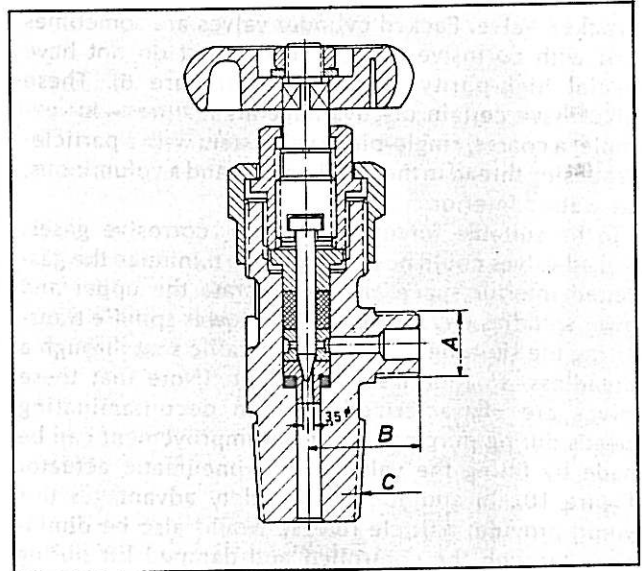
Packed valve with divided upper and lower spindle for pure process gases.
